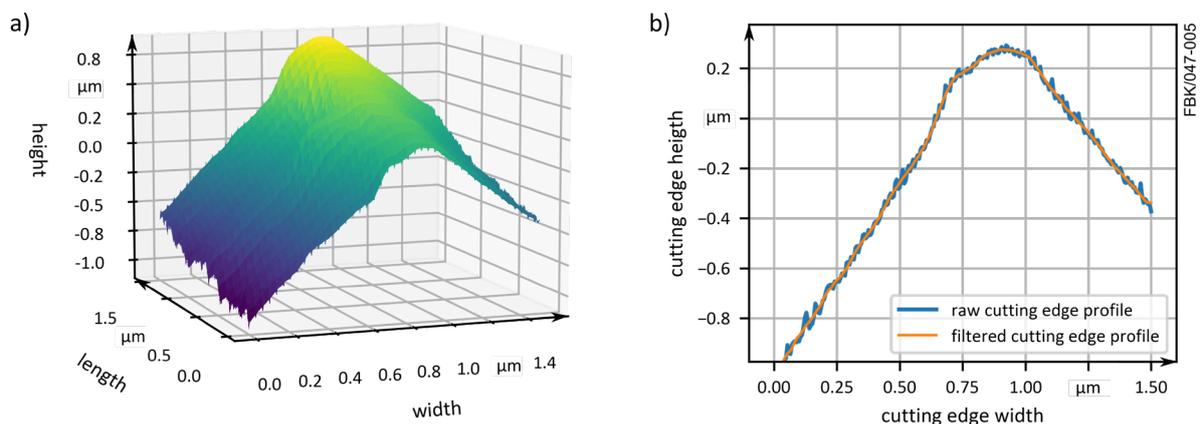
Cutting edge surface (a) and single cutting edge profile (b) after applying the Savitzky Golay filter
